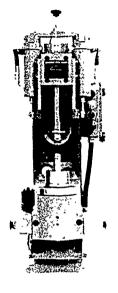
Standard 4000-watt ultrasonic spot welder.
